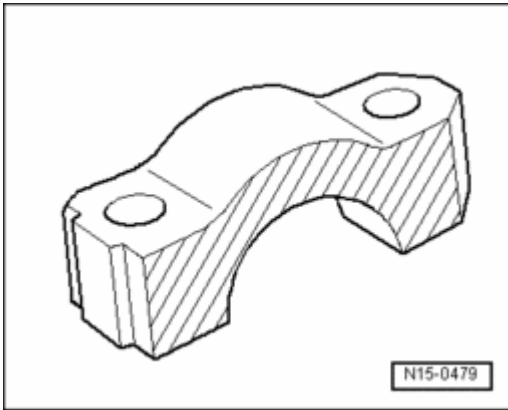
Coating Face Surface Of Bearing Cap For Axial Bearing With Adhesive Lubricating Paste
